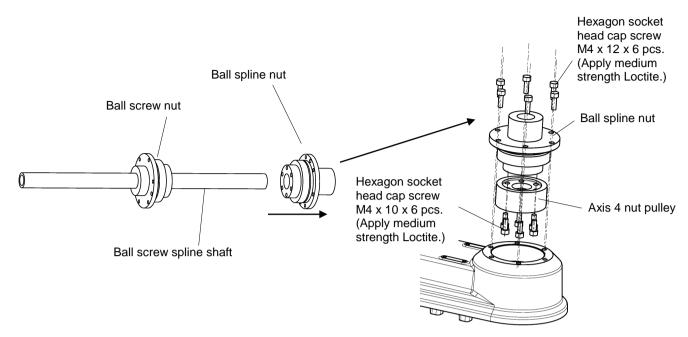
Mounting ball spline nut (KHL-300, KHL-400)
